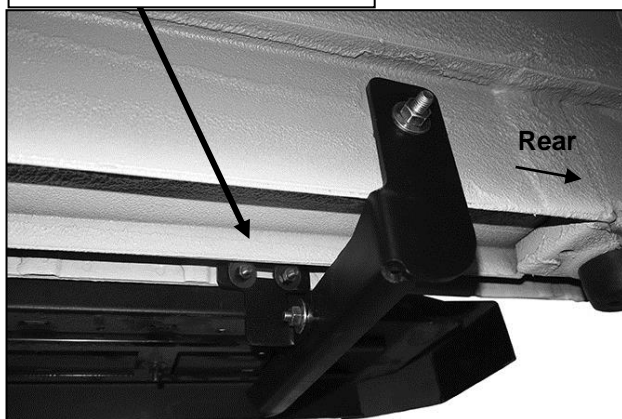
Mark location of each Support Bracket onto pinch weld before drilling 1/4" holes
